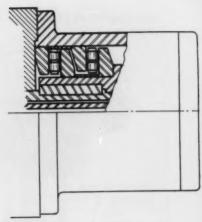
Extruder construction that provides for the installation of an additional set of thrust bearings in the event they are required for extra-heavy-duty application exceeding the original rating of the extruder.
